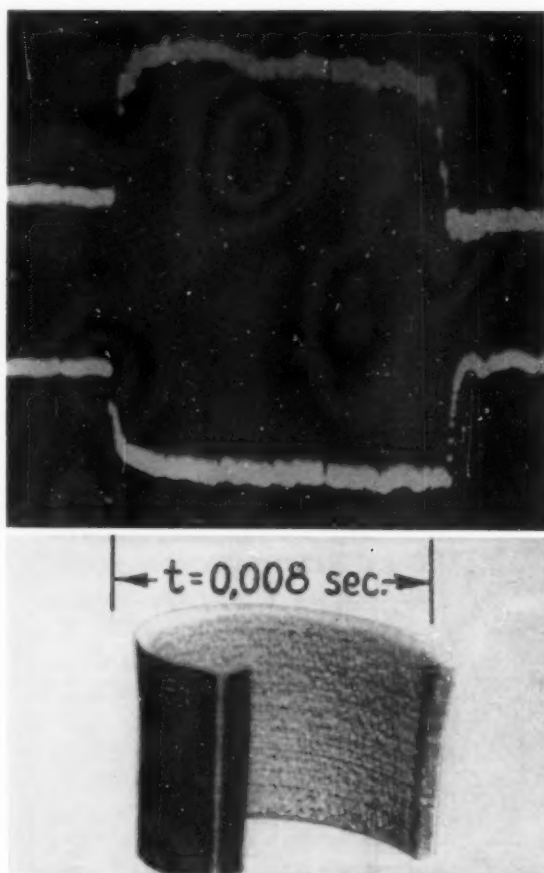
Cutting force and cutting temperature when forming a continuous chip. Workpiece material, SAE 1010 steel; carbide tool cutting speed, 580 fpm; depth of cut, 0.120 inch; feed per tooth 0.004 inch. In the oscillogram the tangential cutting force (upper trace) is 145 lb and cutting temperature (lower trace), 1418 F.
